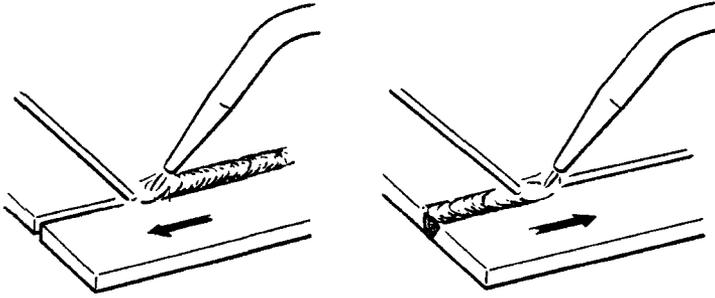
Forehand welding (left) and backhand welding (right).
